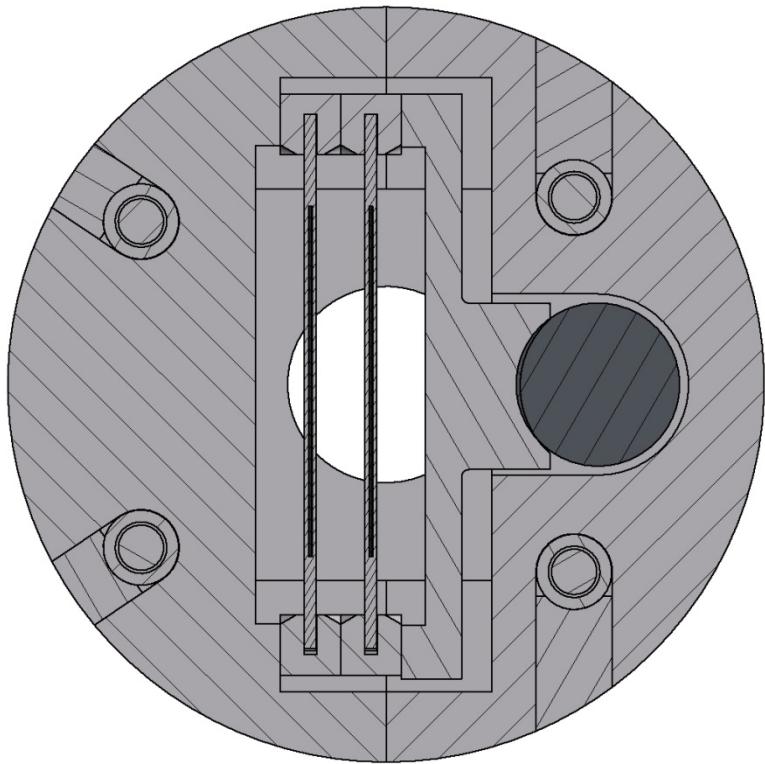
Radial Cross Section of the AFIP Test Train Assembly.
